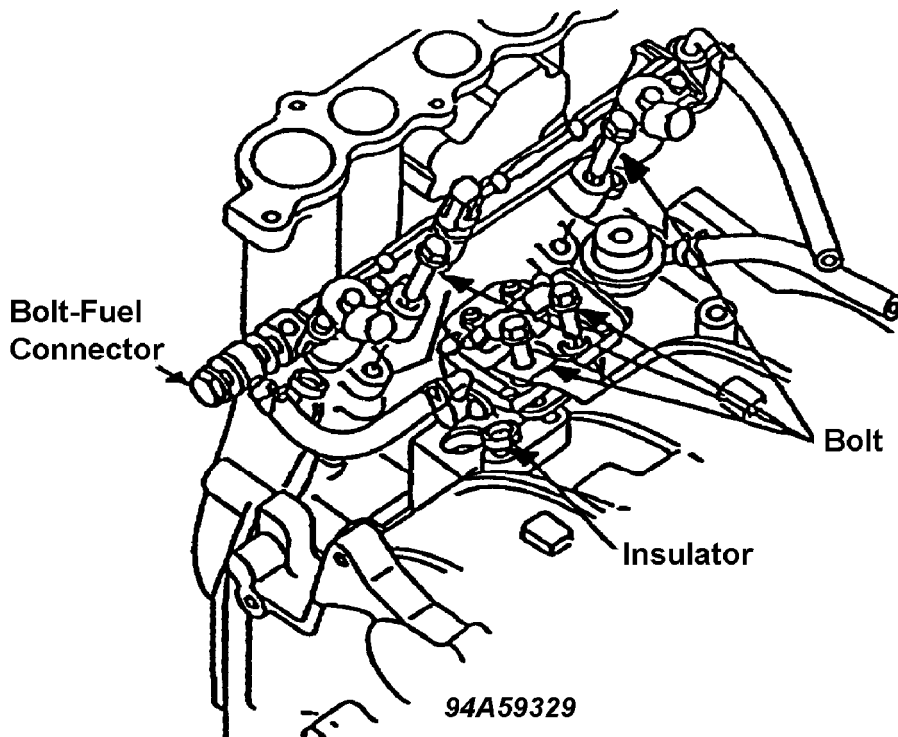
Removal of Primary & Secondary Fuel Distributor & Insulator
